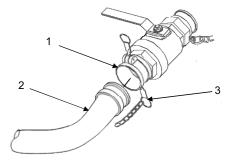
Filler/Discharge Ball Valve Assembly with Hose
